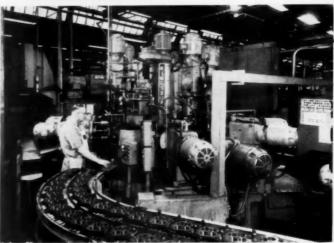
One of a group of five Kingsbury drilling machines on the line for machining Oldsmobile throttle bodies for four-jet carburetors. This center column machine handles 22 operations.
